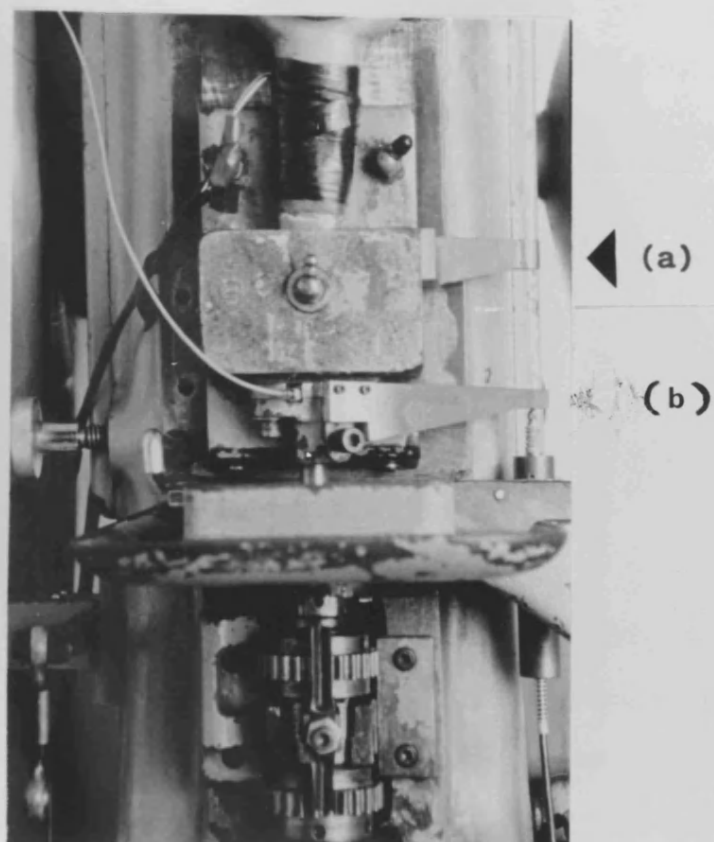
Upper punch assembly showing the initial (a) and improved (b) position of the LVDT contact arm.
